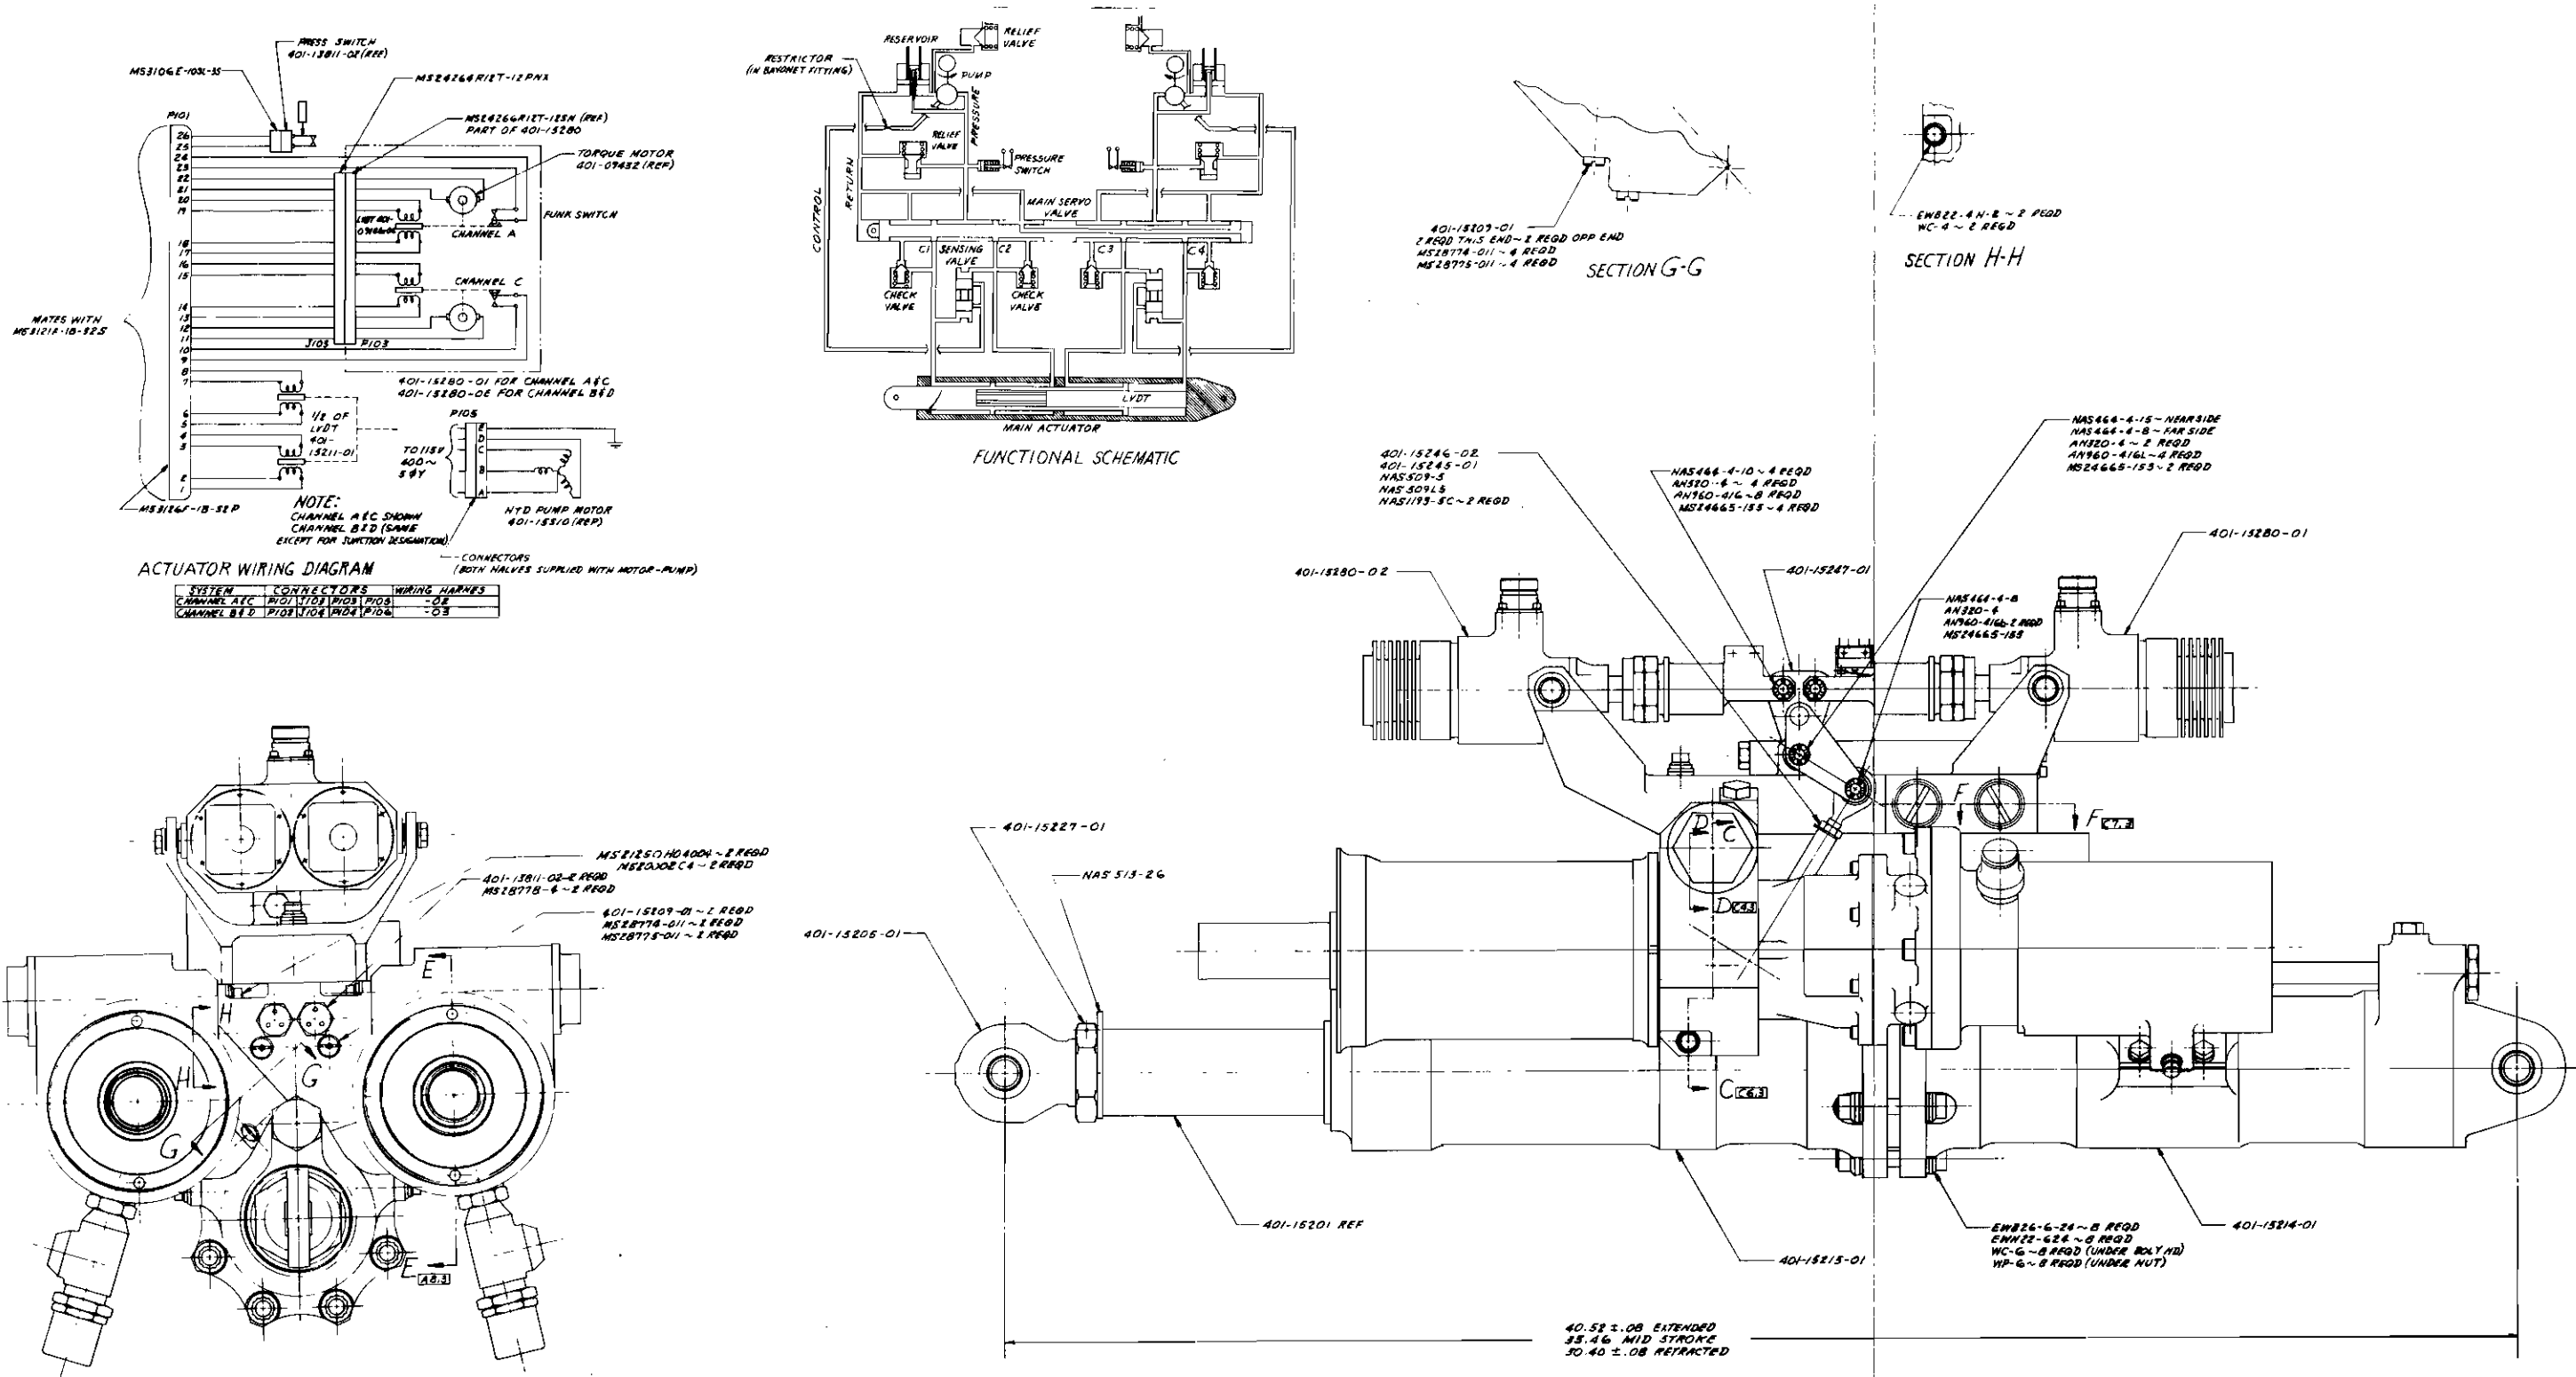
DUPLEX ACTUATOR ASSEMBLY (SHEET 1 OF 2)
